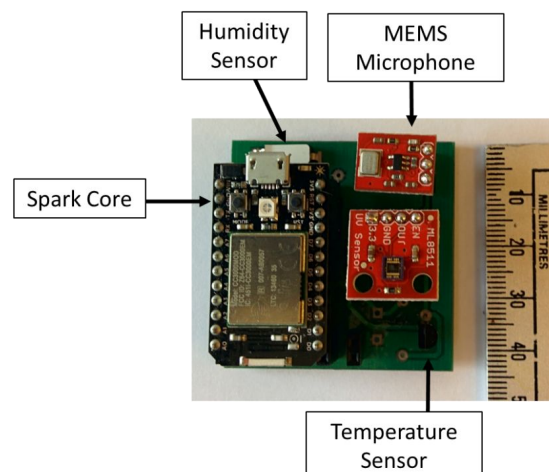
PCB produced for Node C (WiFi Node) fully assembled.
